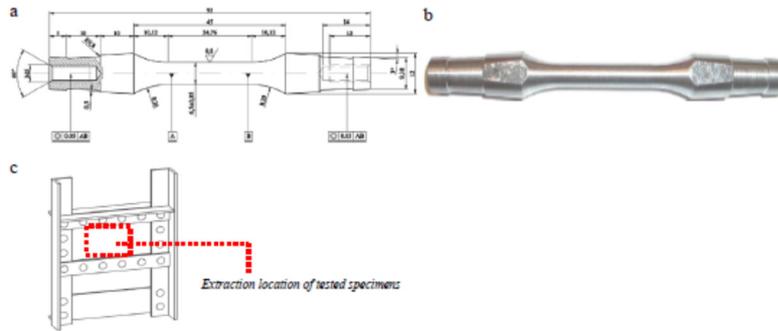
Rotating bending sample, (a) geometrical scheme, (b) manufactured sample, (c) extraction location of tested specimens. Measures in mm.
